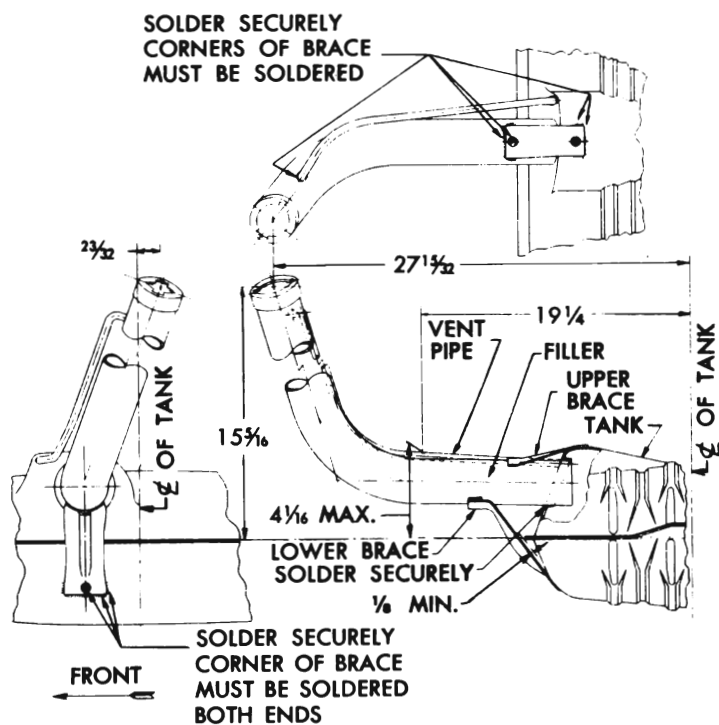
Location Dimensions for Gasoline Tank Filler—1949 Series 50-70
